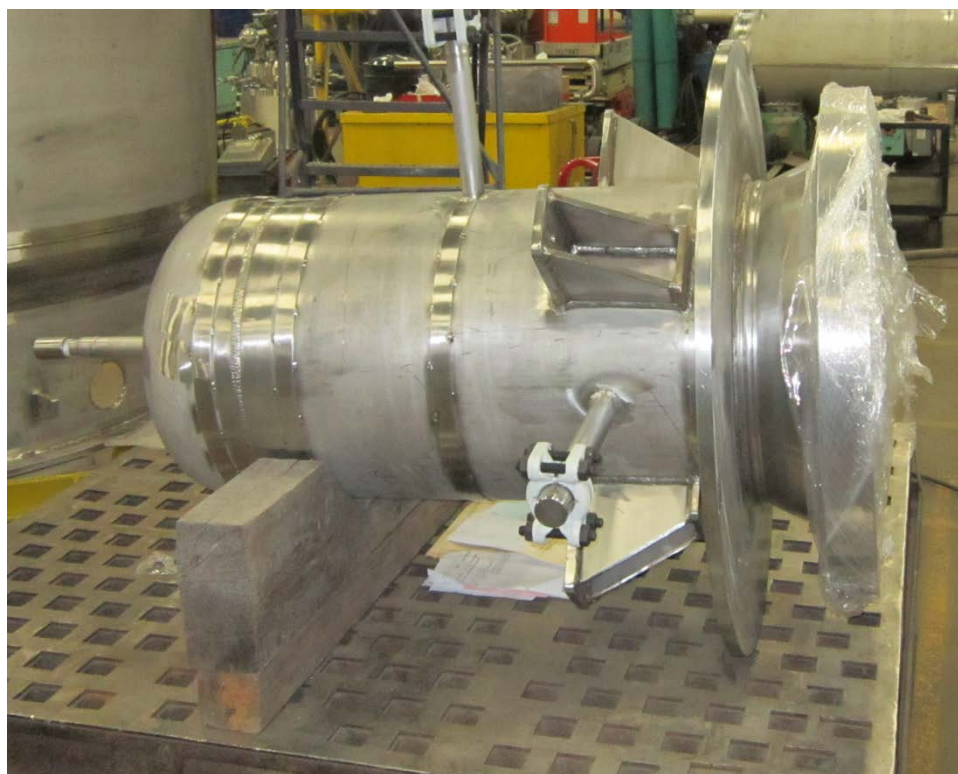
A photo of the preexisting 18" vessel during a fabrication inspection. The vessel had already been cleaned, so the top flange (right side) was sealed with plastic wrap. (This phot was taken during FY2014).
